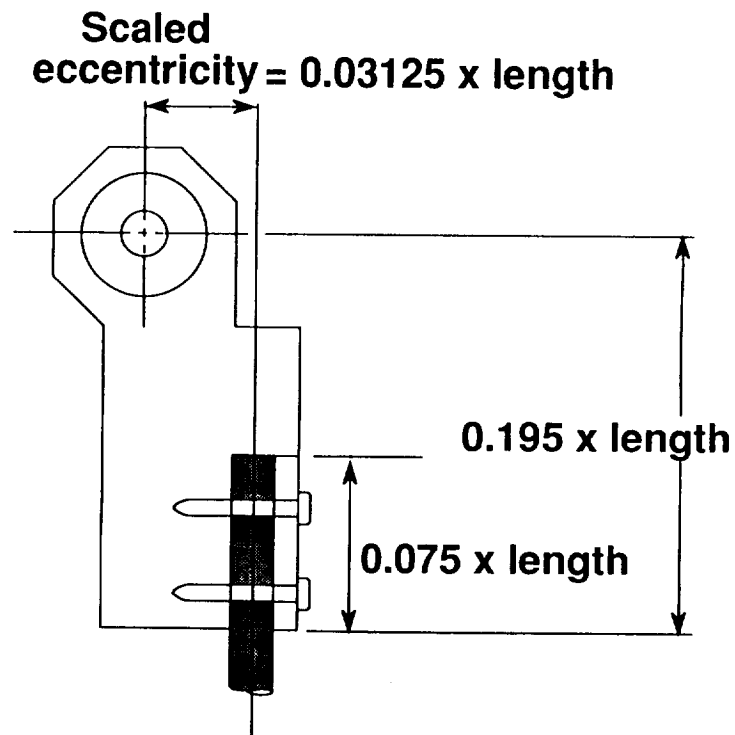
Detailed drawing of the hinge-beam attachment.
